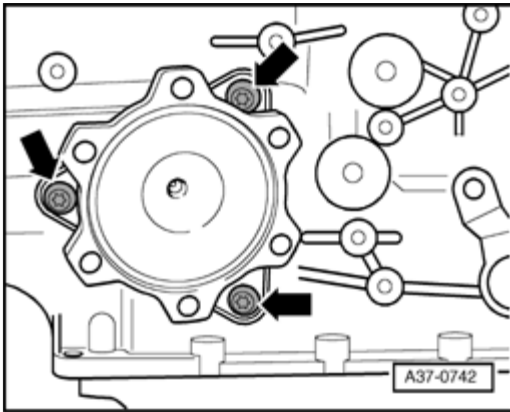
Removing Bolts On Retaining Bracket For Left-Side Flange Shaft
